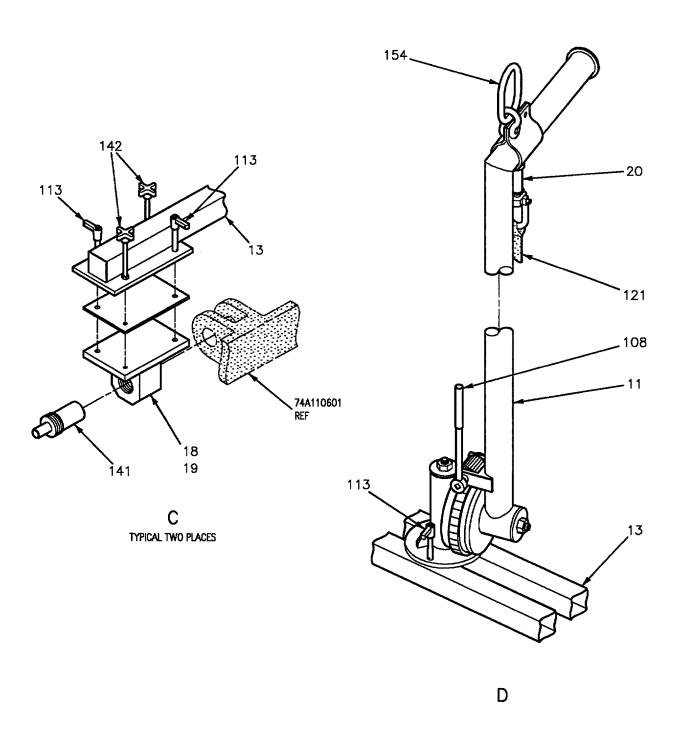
Attaching Hoisting Adapter to 74A110601 Lower Skin (Sheet 3)
